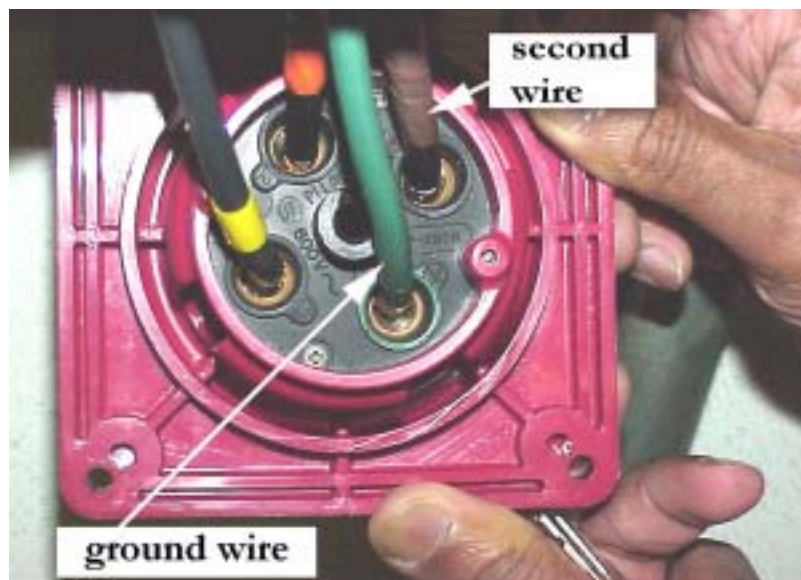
480-volt disconnect box and welding receptacle
